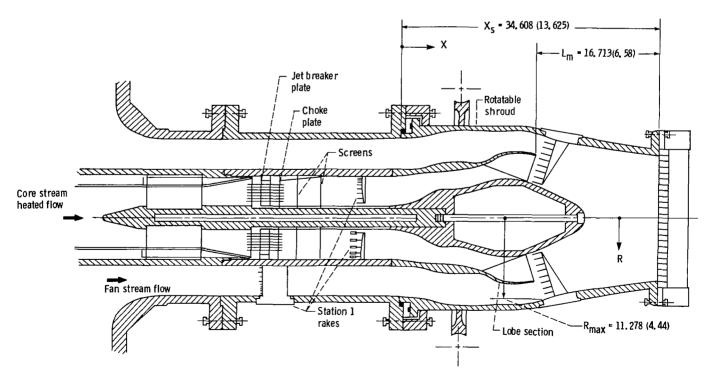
Mixer nozzle model cross section. (Dimensions are in centimeters (in.).)
